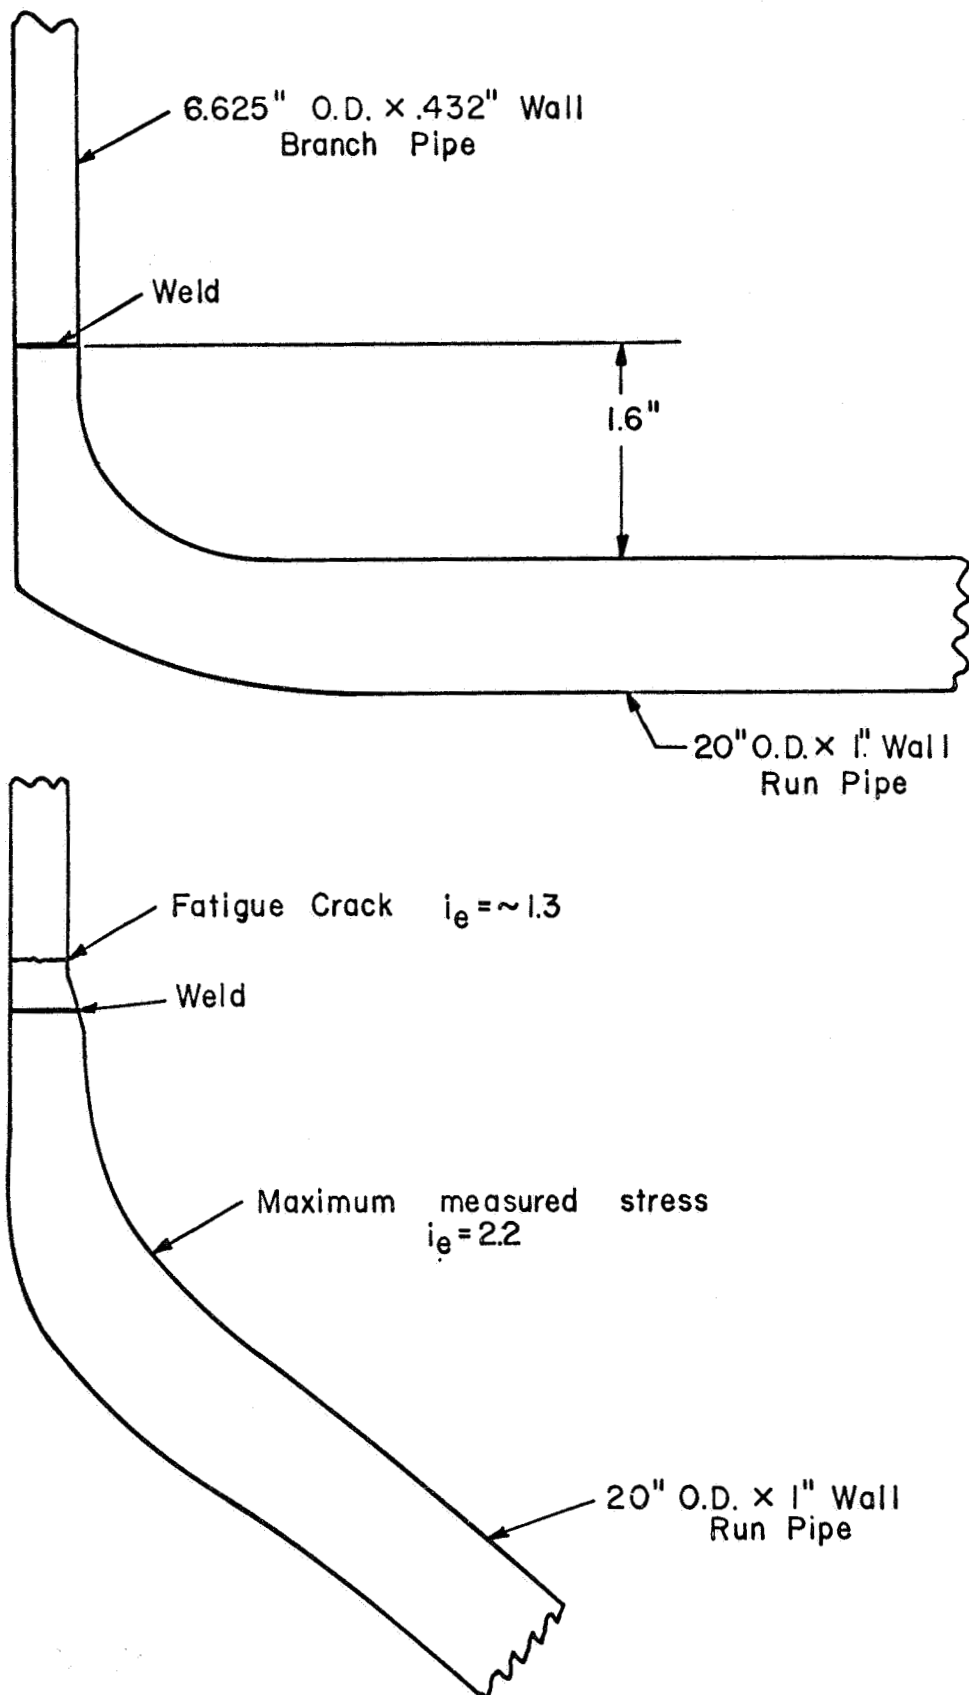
DIMENSIONS, FATIGUE FAILURE LOCATION AND MAXIMUM MEASURED STRESS LOCATIONS, REFERENCE (47) MODEL L
